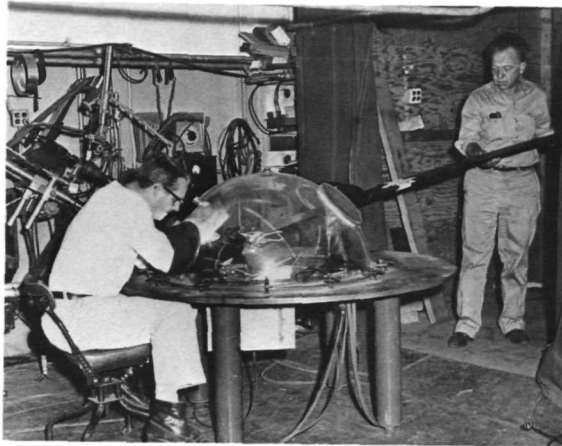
Adaptation of a small chamber to provide localized shielding of a large part during welding.
